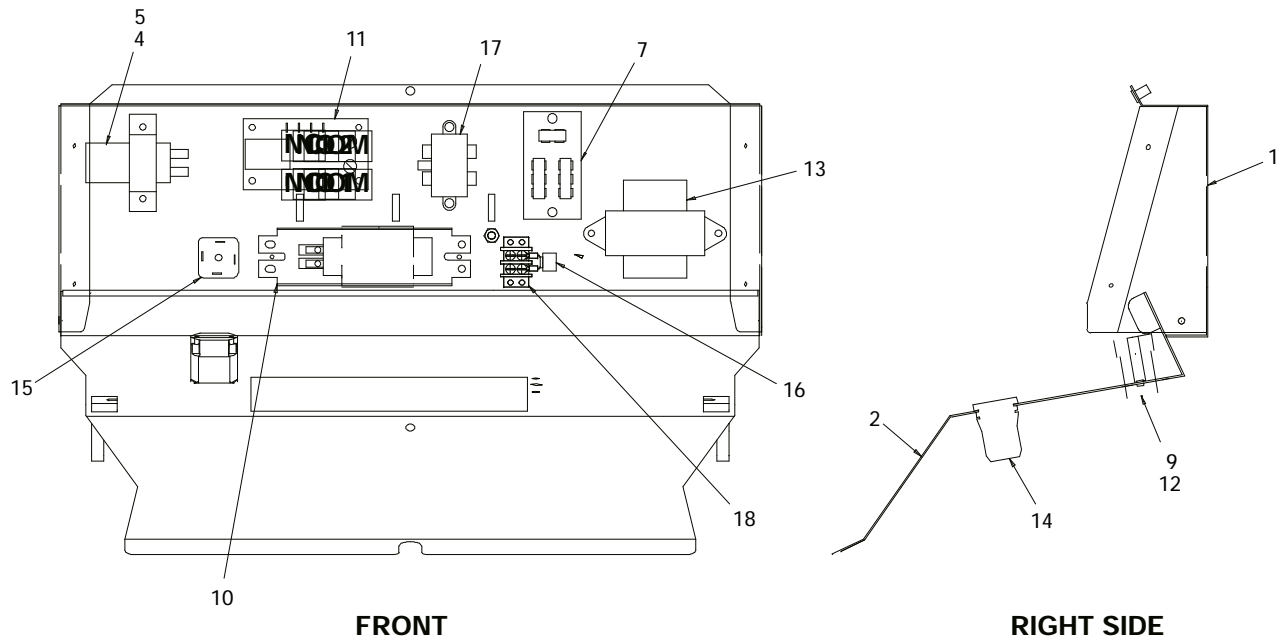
ELECTRICAL BOX ASSEMBLY EXPLODED VIEW
